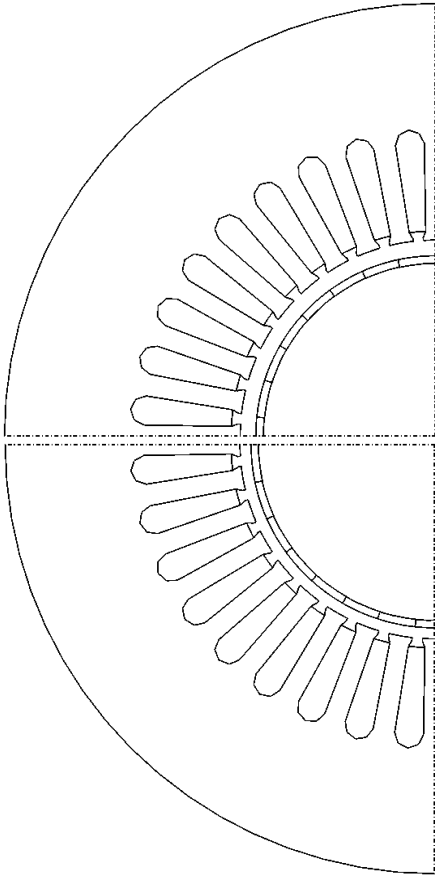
Initial (left) and optimized (right) designs of the coated rotor.
